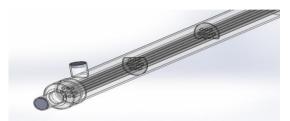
(c) Geometrical model of tube bundle with 5° inclined segmented baffle
